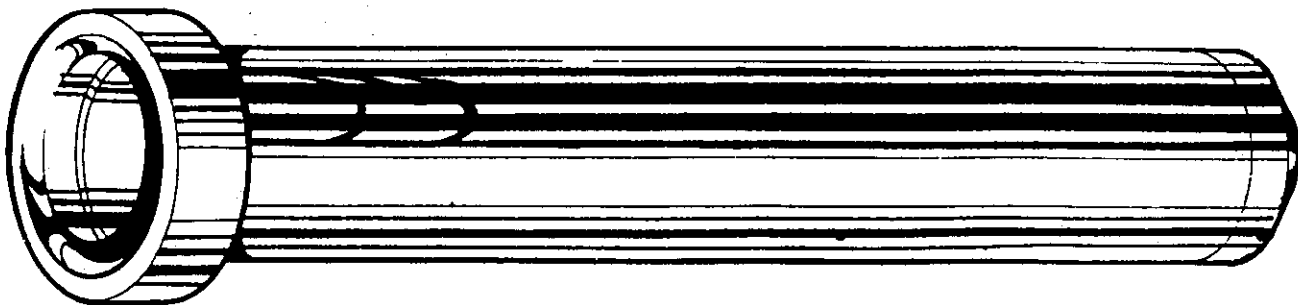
Fork column bottom cone fitting tool No. 60-2218.
